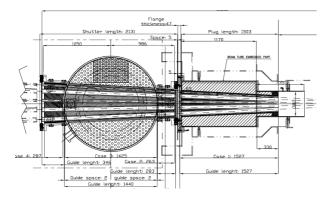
The plan view of the primary shutter and the in-pile plug assembly
